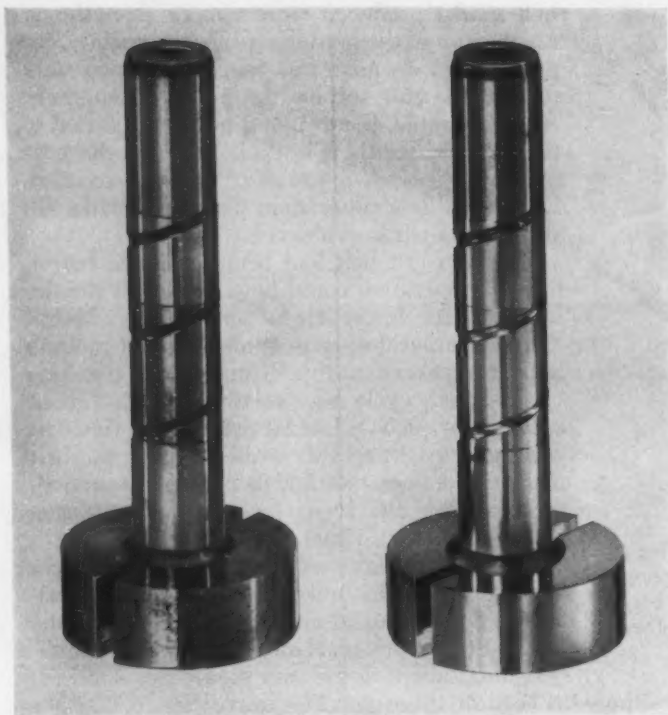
Refrigeration compressor rotor before and after processing by a special barrel-finishing technique. The edges of slots in the rotor (right) were rounded, the surface finish was improved, and the oil groove was deburred.
